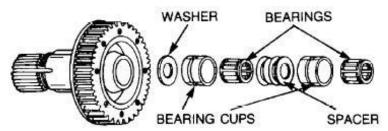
Installation of the Mainshaft and Output Shaft Pilot Bearing
